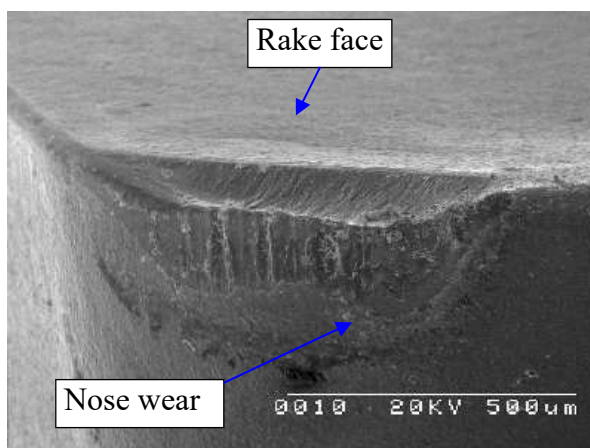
are typical micrographs of worn T2 (uncoated carbide tool – 890 grade) inserts after machining Ti-6Al-4V alloy at different cooling and cutting speed conditions. Both flank and nose wears occurred simultaneously at the cutting edge. The flank
